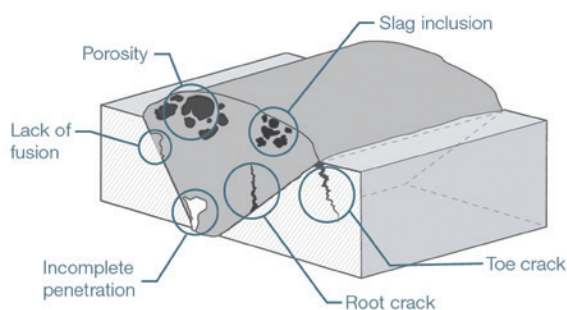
Different types of weld defects can significantly weaken the bond between the components that are being joined together.
